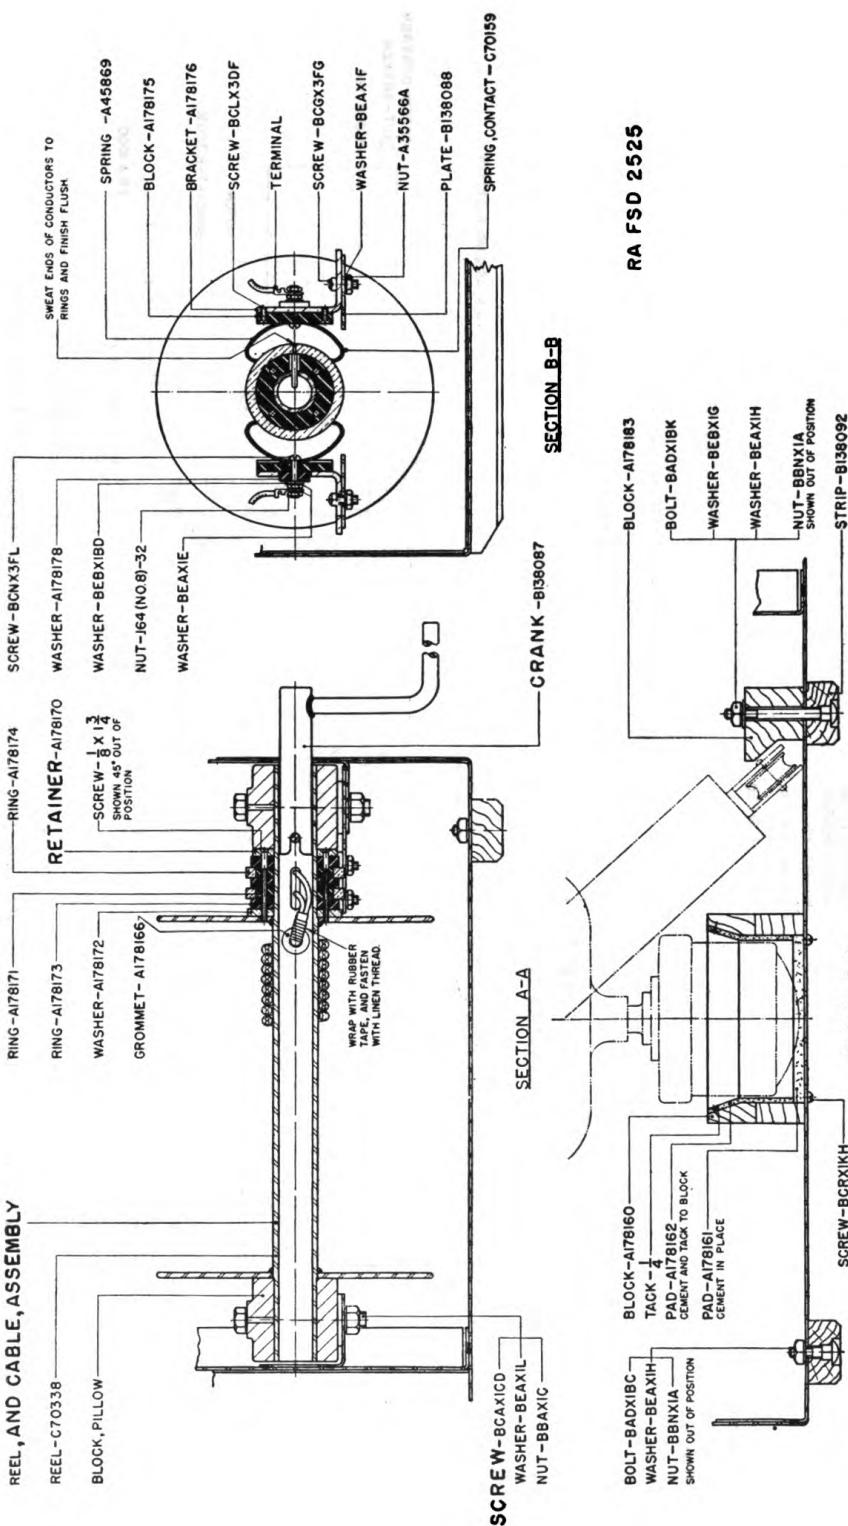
Binaural training instrument, M2—transcription unit, sectioned views. (See fig. 6 for location of section planes A-A, B-B, and C-C.)
